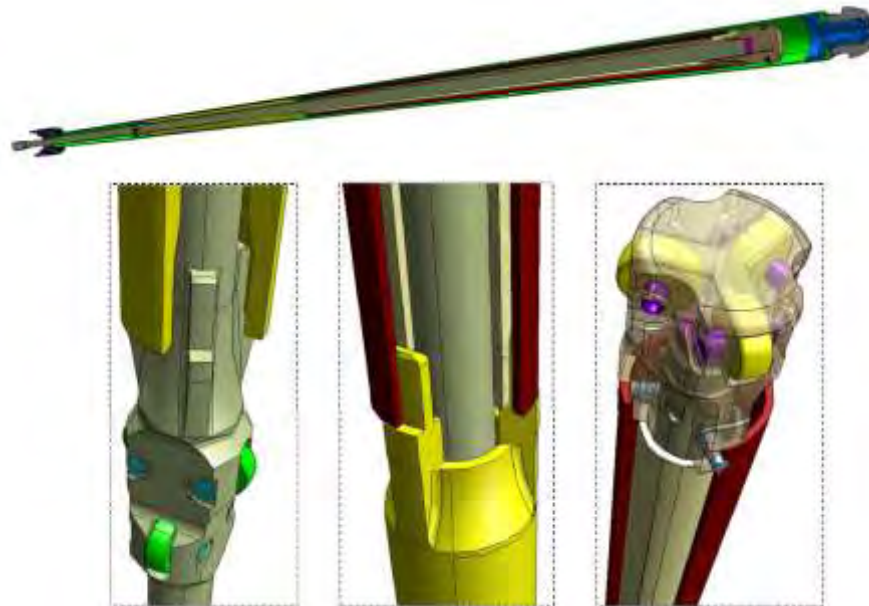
illustration of the upper rod assembly; lower and upper carriages and connections between central rod, aluminum tube of the follower and hafnium tubes of the absorber
